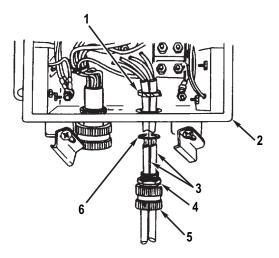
Front Dolly Internal Marker Clearance Light Cable Assembly Disconnection.
